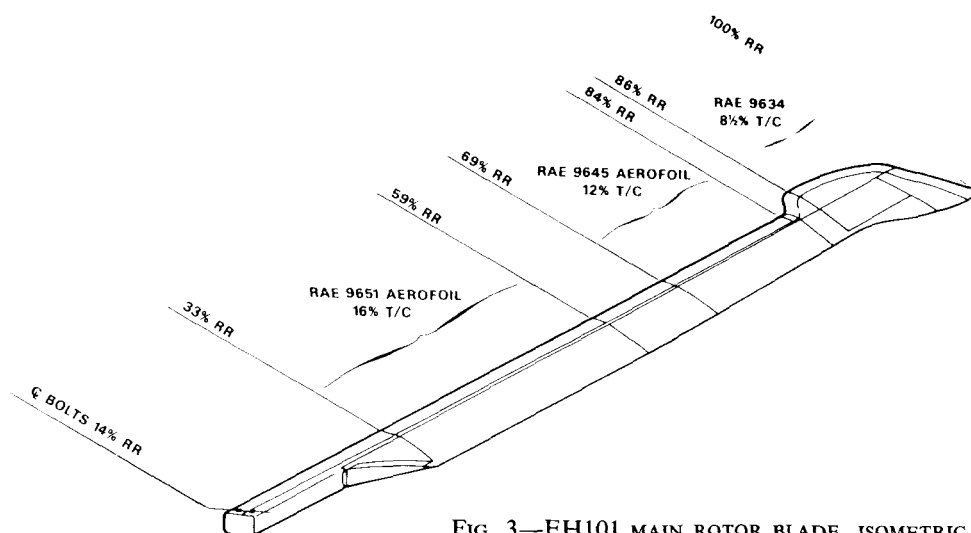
EH101 MAIN ROTOR BLADE, ISOMETRIC VIEW
